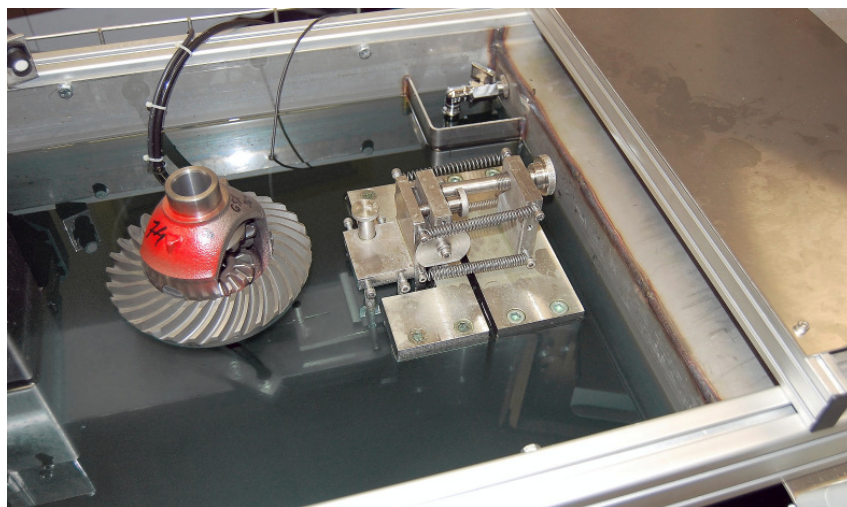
UT with immersion tank for weld seam testing of gear components
